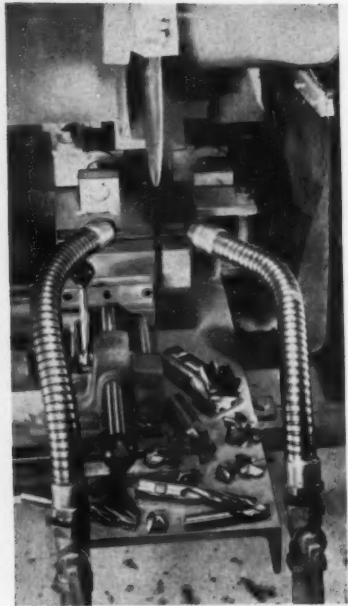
(Right) Close-up of machine illustrated in Fig. 1, showing reclaimed tools
